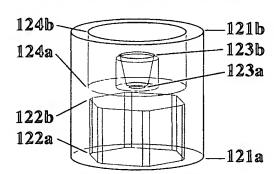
· Part 12 · Small dual nozzle cap · nozzle cleaner up
